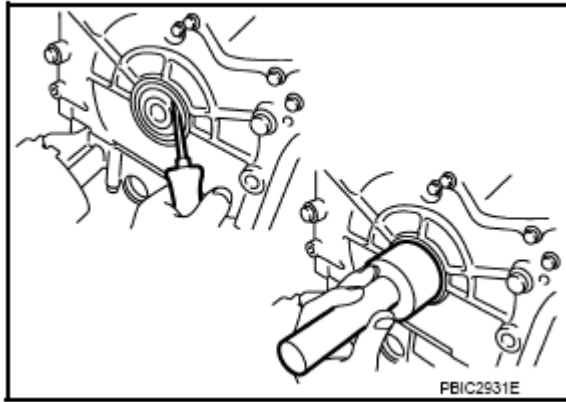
Removing Front Oil Seal Using Suitable Tool
